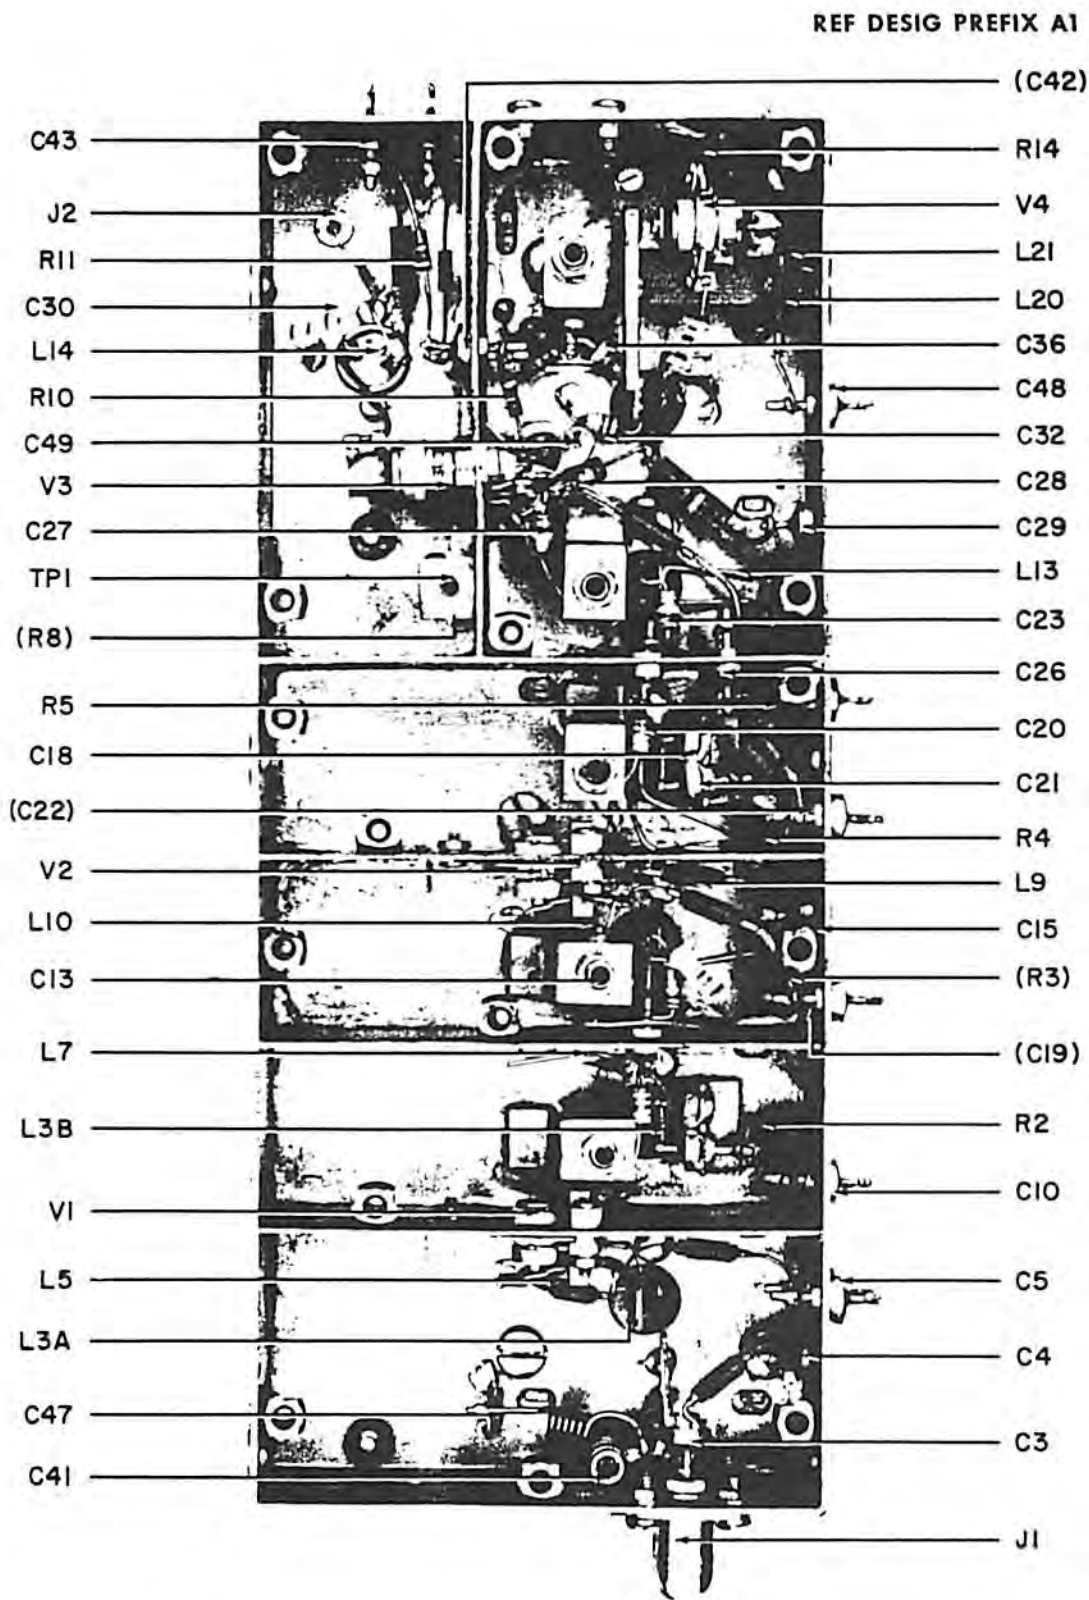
Type 7104 235-500 mc Tuner, Component Locations
